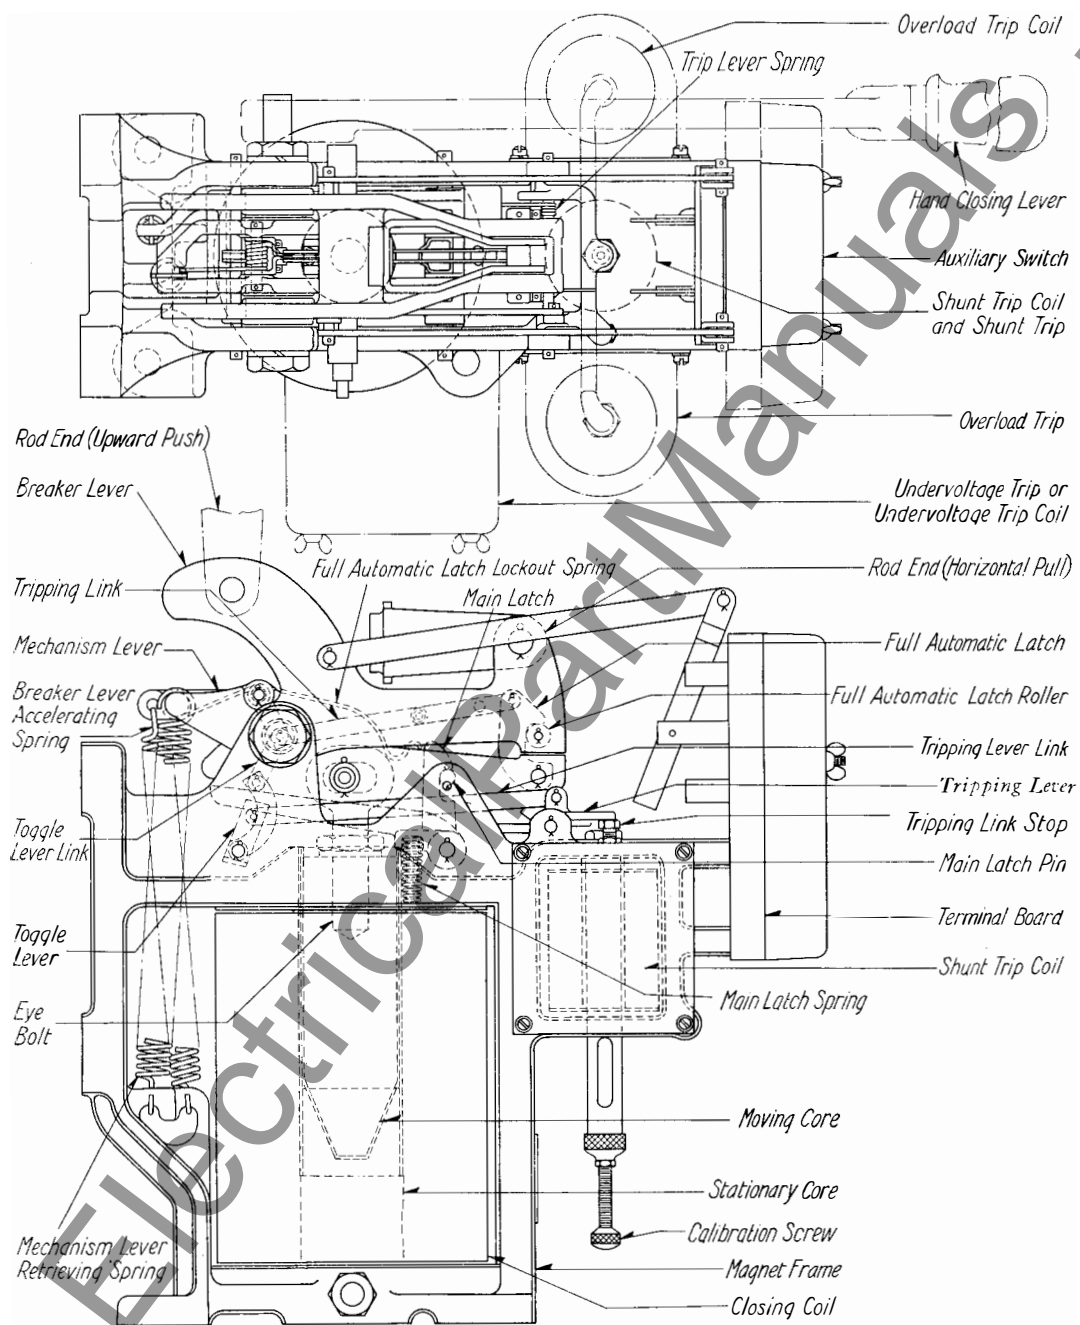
TYPE SA-2 OPERATING MECHANISM FOR TYPE F-22 OIL CIRCUIT-BREAKER
